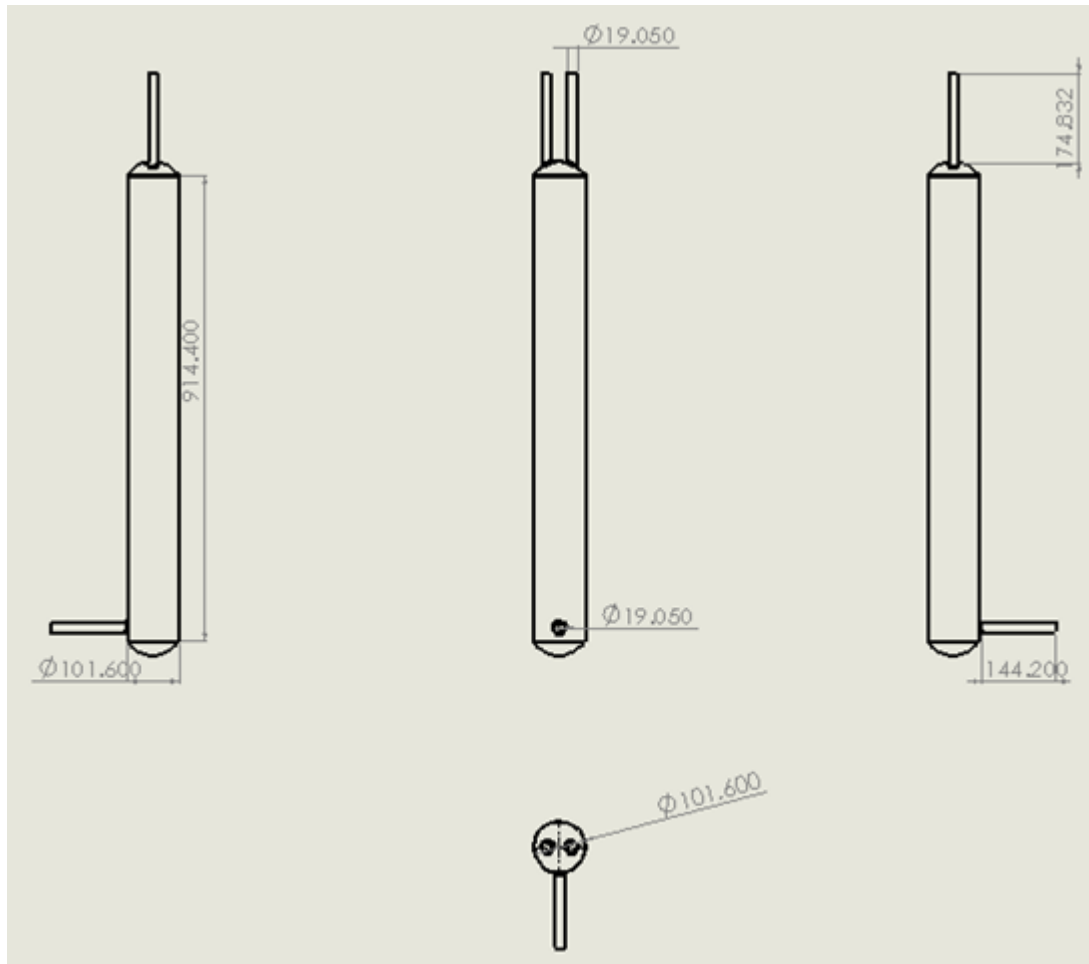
Process cylinder Dimensions (Units in millimeters)
